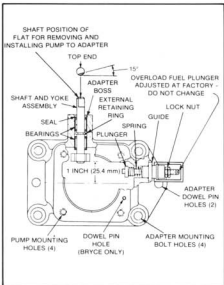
INJECTION PUMP ADAPTER ASSEMBLY
